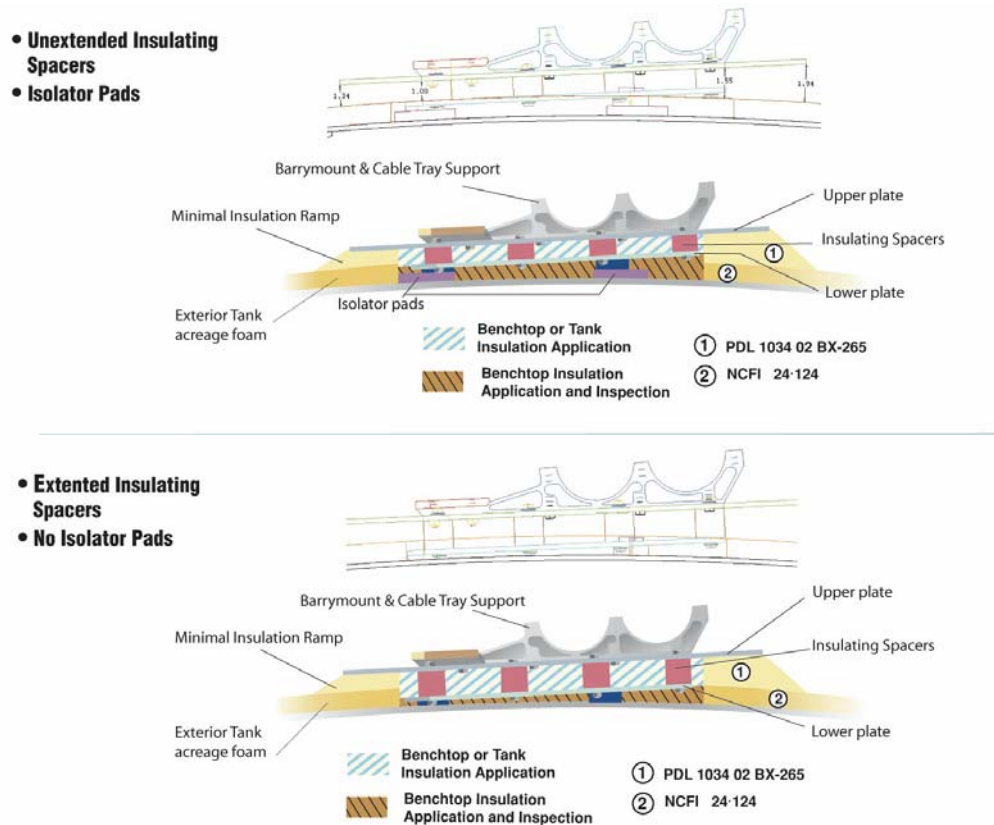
Z18-2 LH2 IFR Concept Cross Section Details
